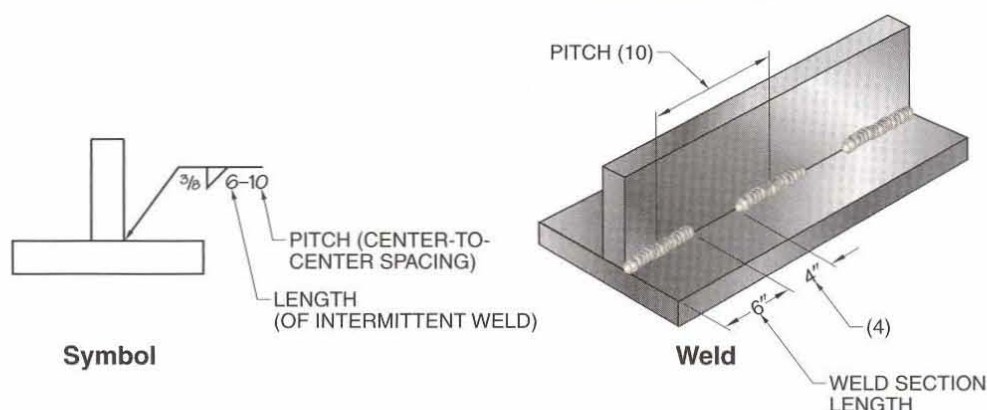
The length and pitch increments of intermittent welds are shown to the right of the weld symbol.
